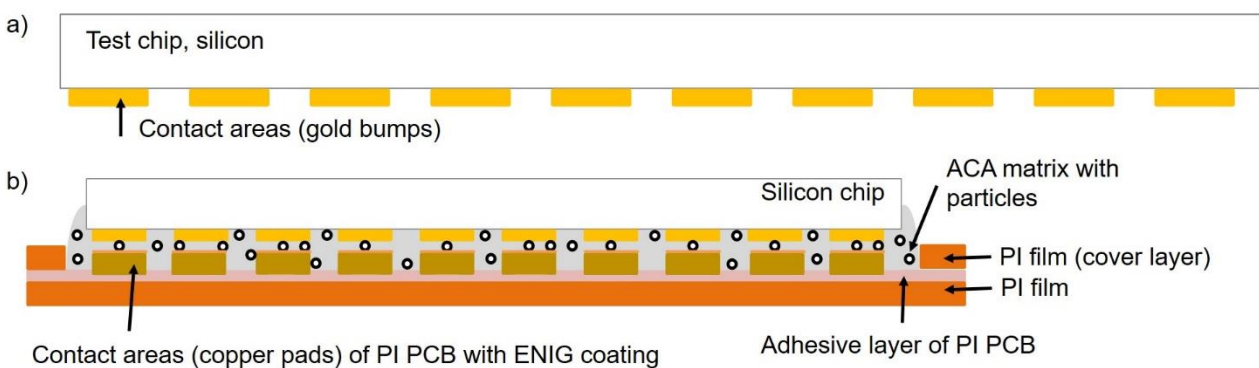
Schematic drawing of a) test chip b) test chip attachment on PI PCB.
